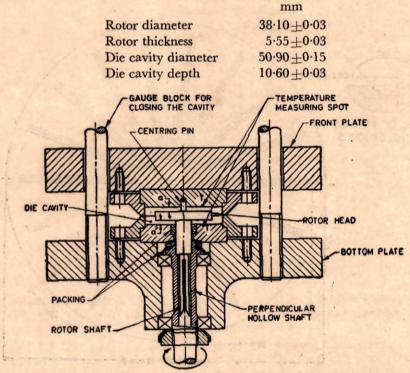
Essential Parts of the Shearing Disc Viscometer
